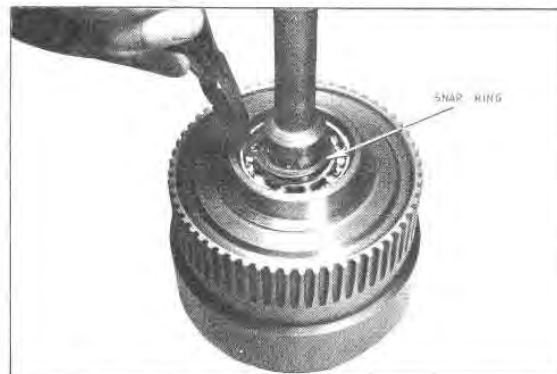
Installing the Drive Gear Bearing Snap Ring
